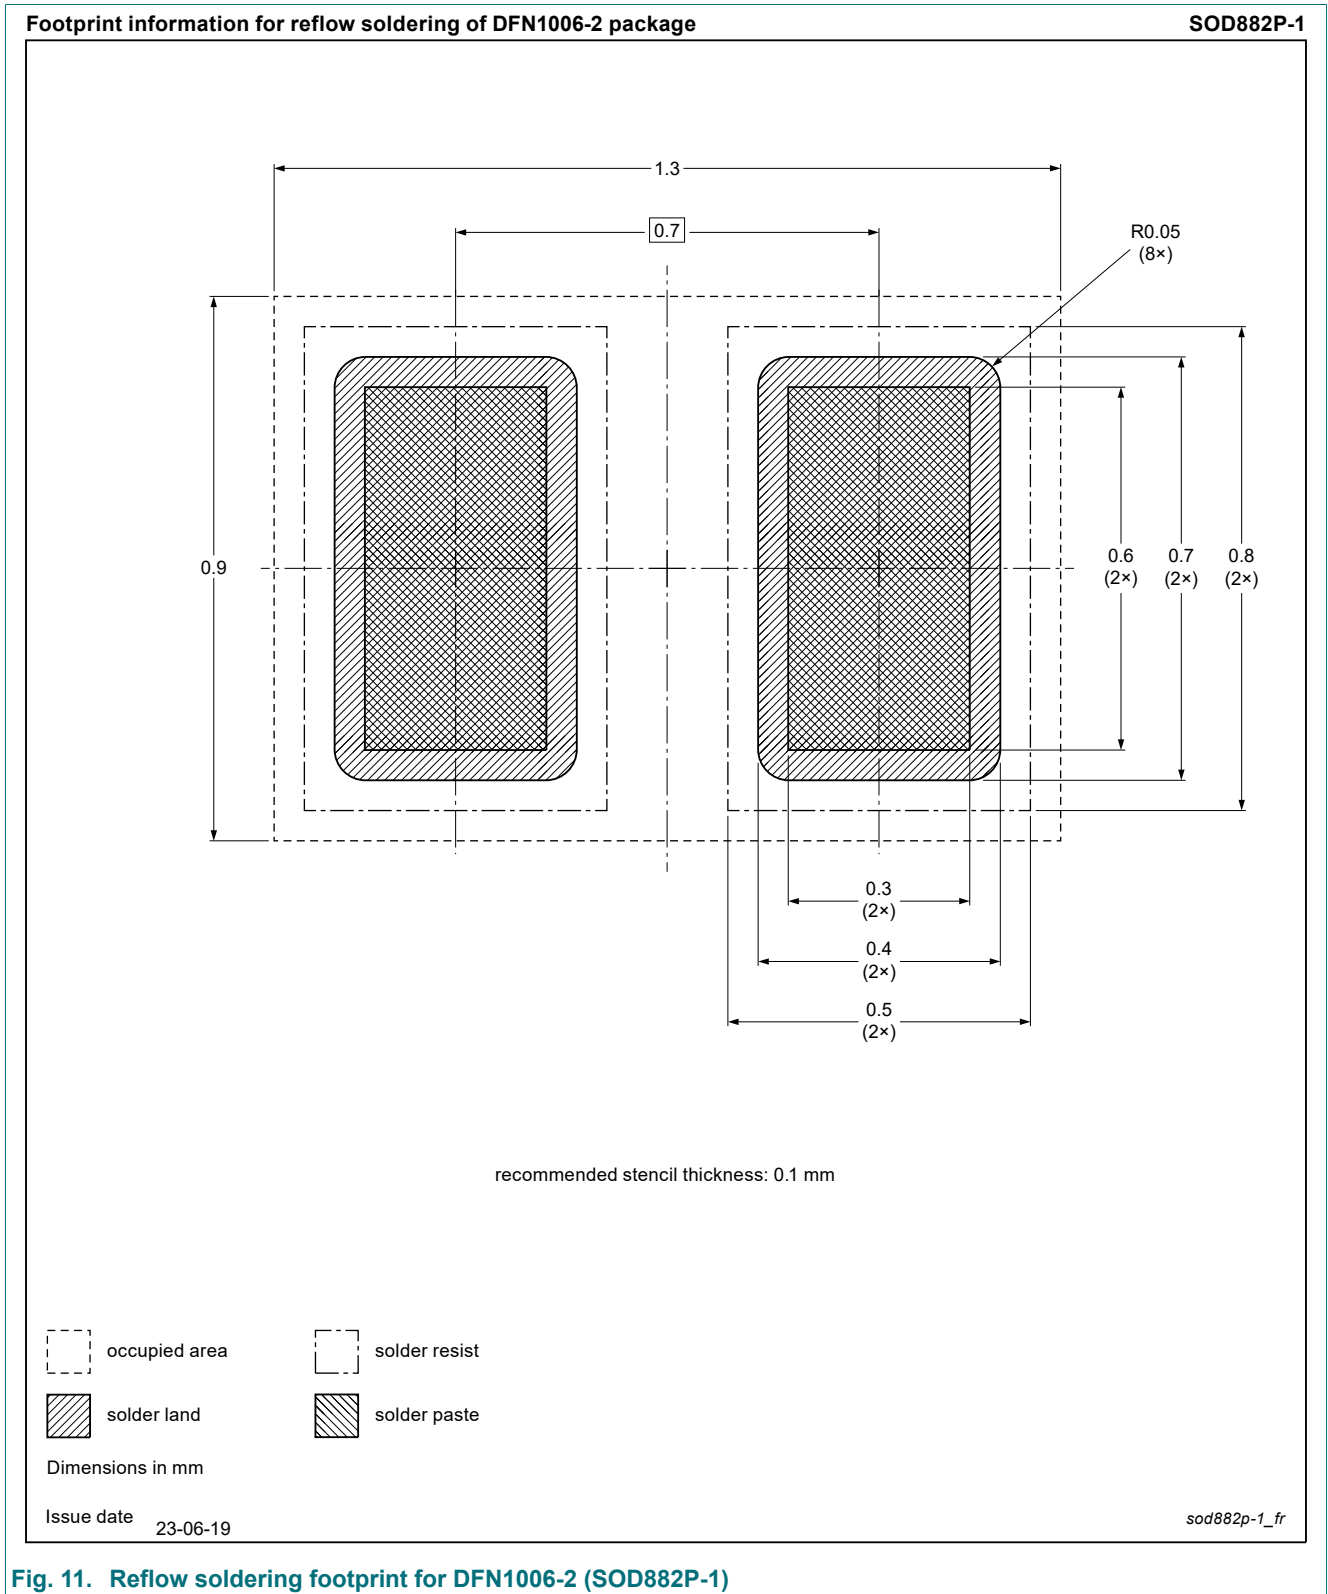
Reflow soldering footprint for DFN1006-2 (SOD882P-1)
